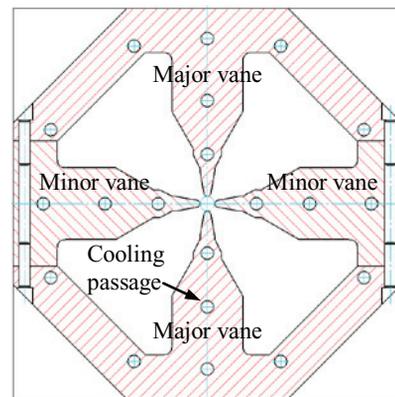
Cross section of the first segment at a fixed longitudinal position.
